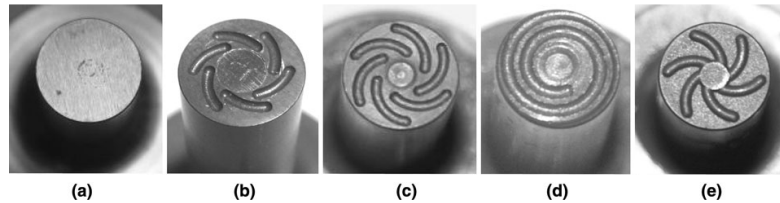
The different pinless tool designs compared in this work, from Bakavos & Prangnell (2009): (a) the featureless flat tool, (b) the short flute wiper tool, (c) the long flute wiper tool, (d) the fluted scroll tool, and (e) the proud wiper tool
